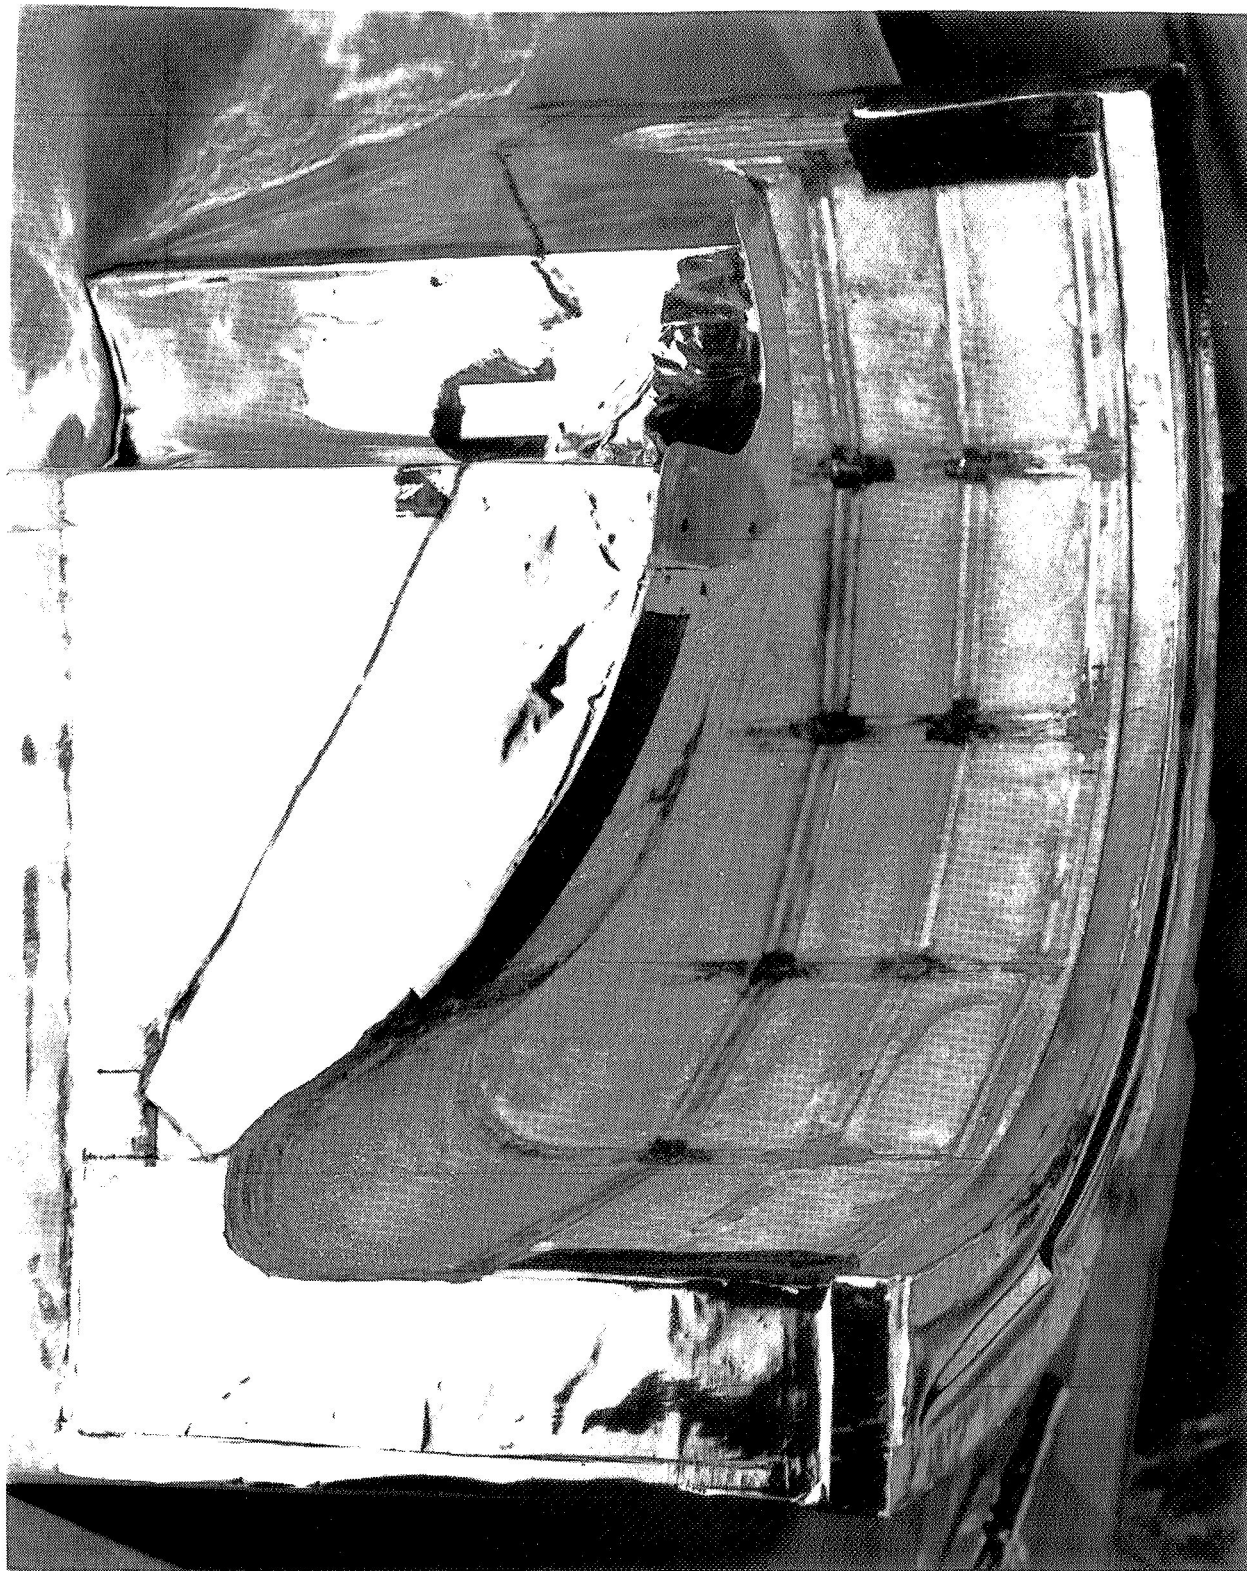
Inner Skirt Casing Vacuum Fixture (220-70)
